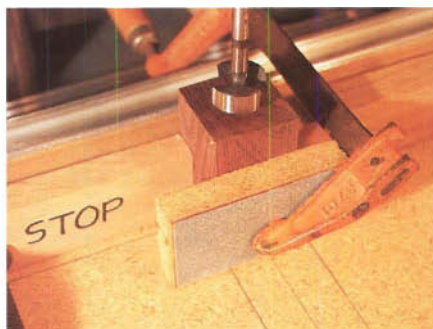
Set up your drill press to bore each of the three segments. Safety is paramount here: Make sure the workpiece is firmly clamped.
